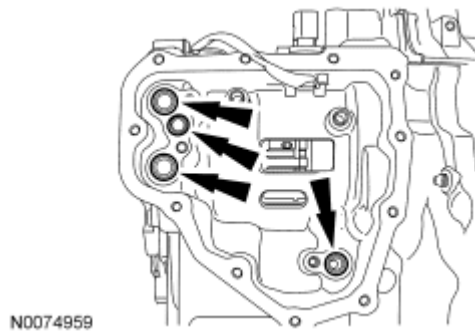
Inspecting O-Ring Seals For Damage
